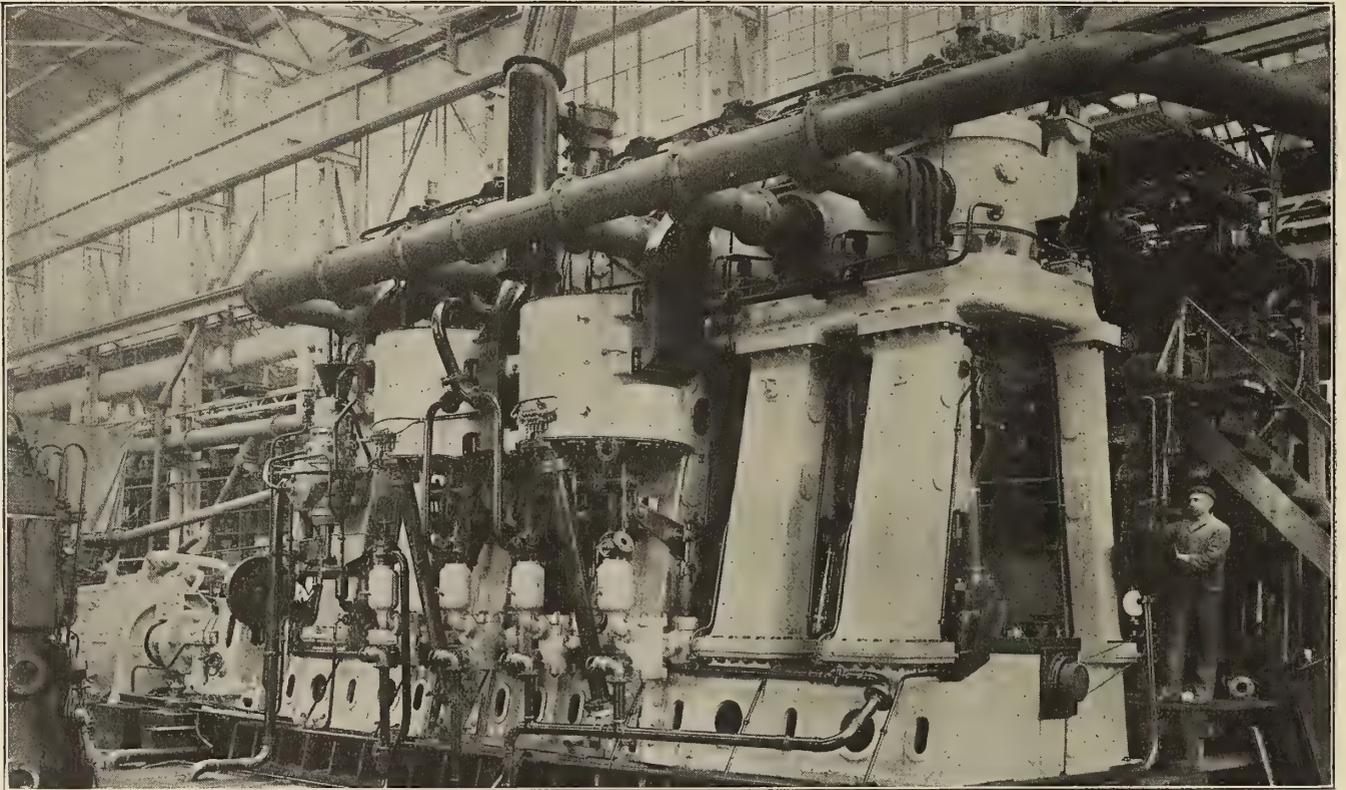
REAR VIEW OF ONE OF HAGEN'S ENGINES, SHOWING PUMPS
